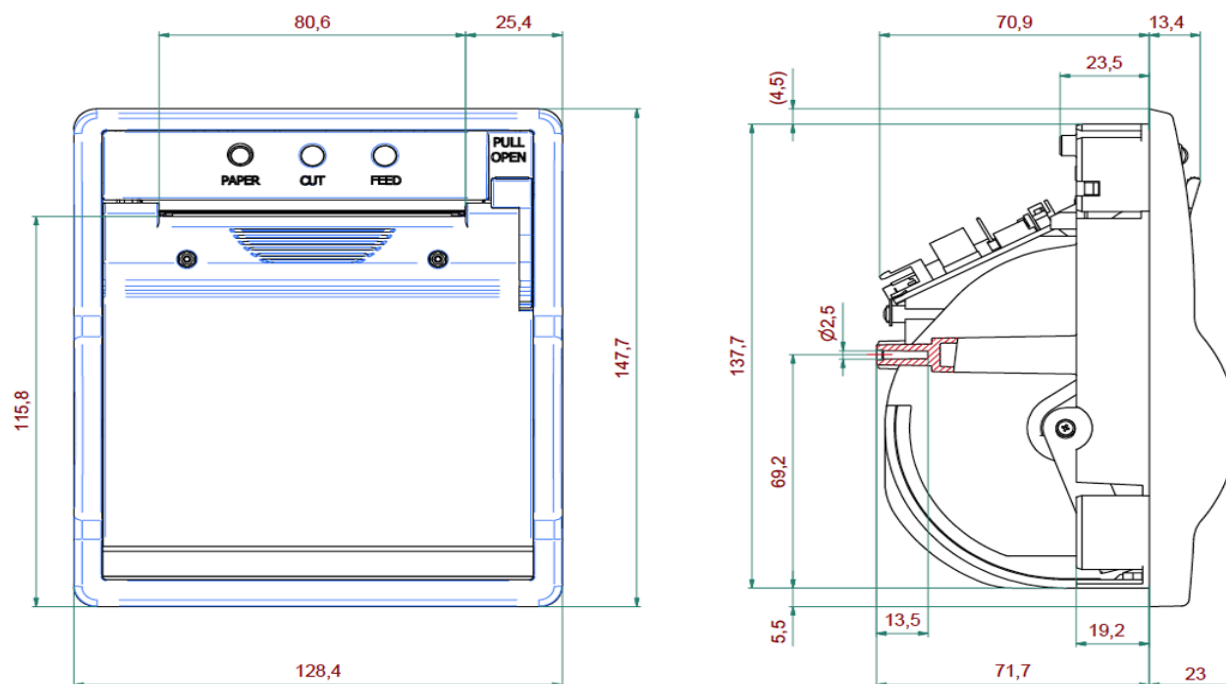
Dimensions GeBE-MULDE Naut GPT-6653 (max. \varnothing 80 mm paper roll) in mm
